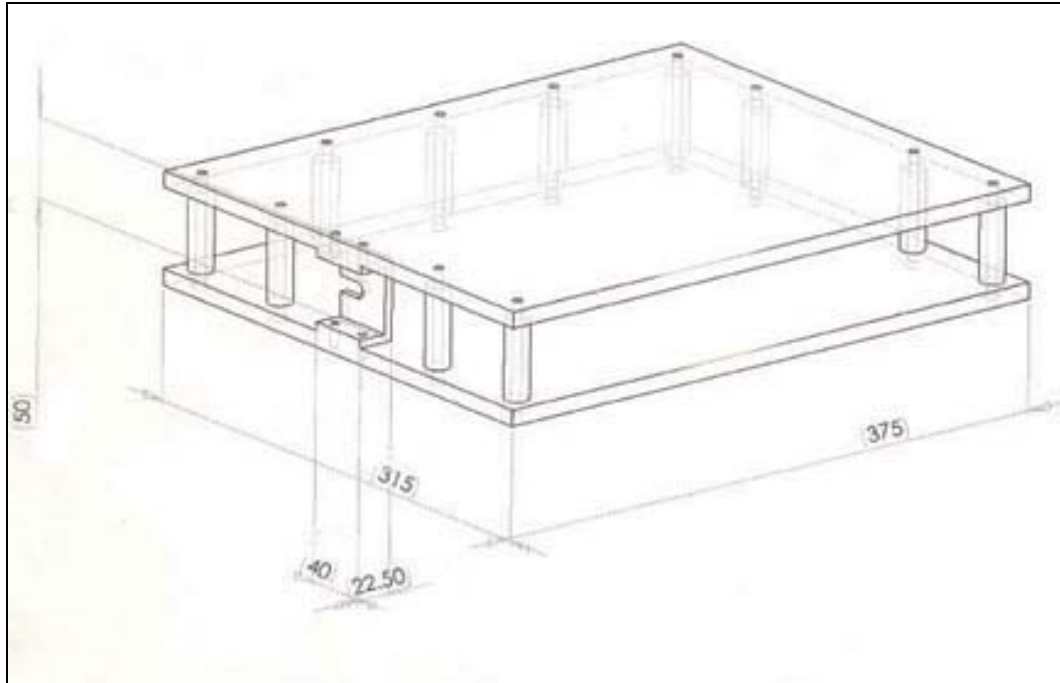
SolidWorks® drawing of a burst chamber: isometric view.
